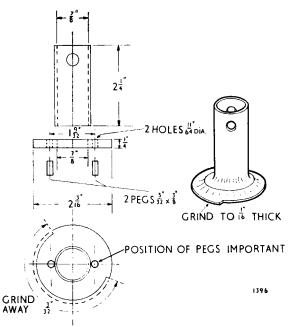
The top timing chain adjusting tool (Churchill Tool No. J.2.)
